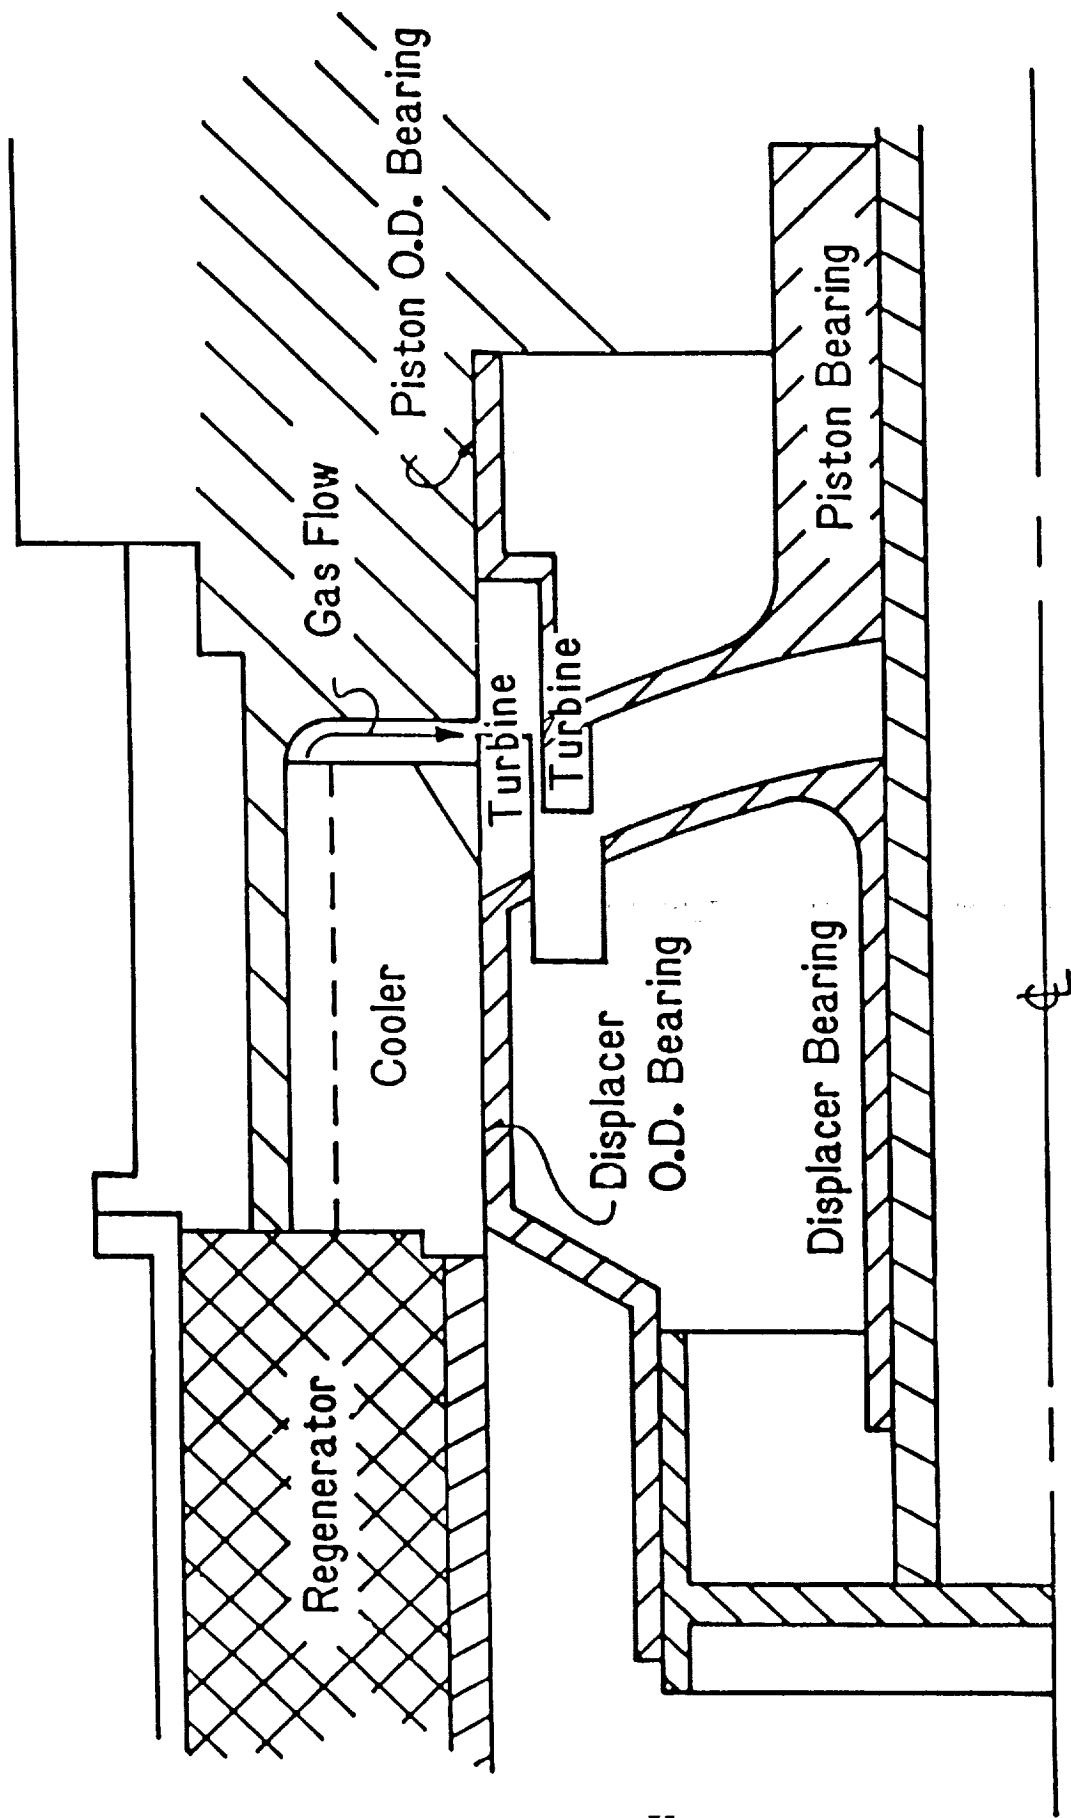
SPIN BEARING ARRANGEMENT IN STIRLING ENGINE
